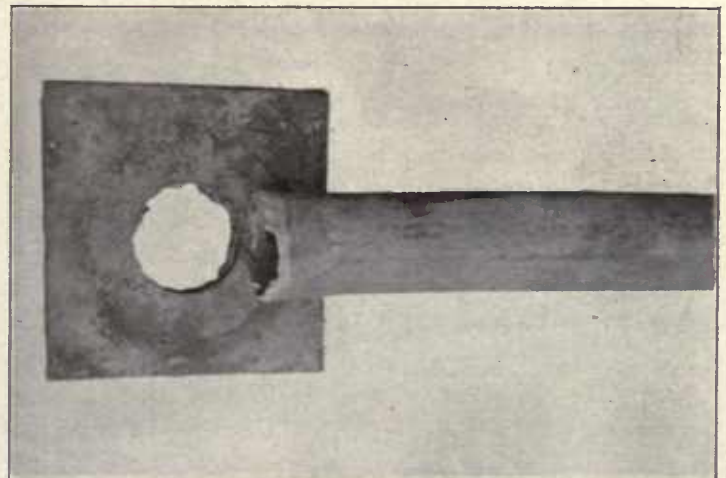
Welded Tube Pulled from Sheet.
